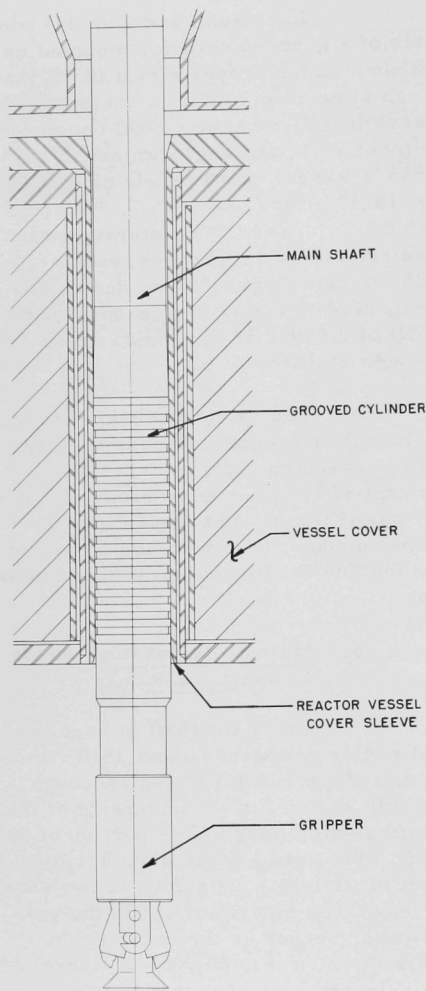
Main Shaft Seal through Reactor Vessel Cover
